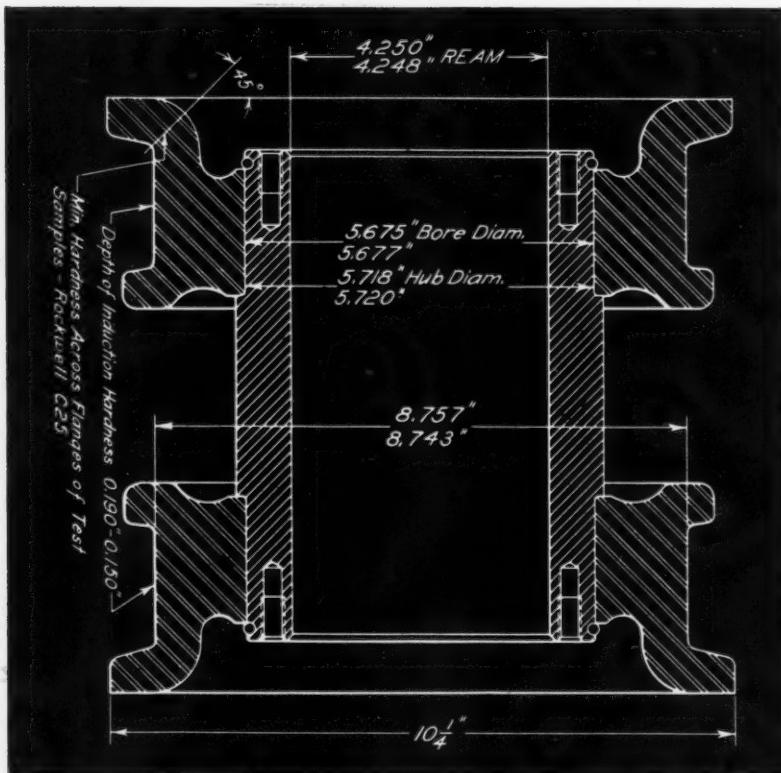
Cross-sectional Drawing of a Double-flange Track-roller Assembly, which Shows how the Rollers are Mounted on the Hub and Indicates the Size of the Parts
